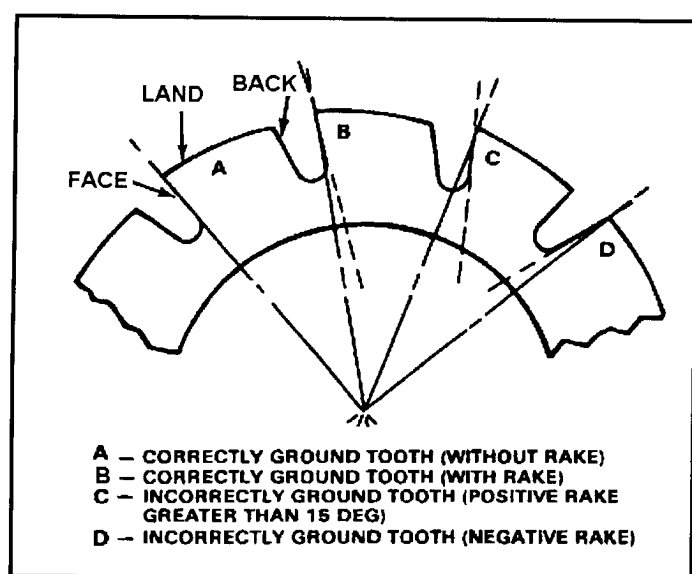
Correct and incorrect grinding of formed milling cutter teeth.
